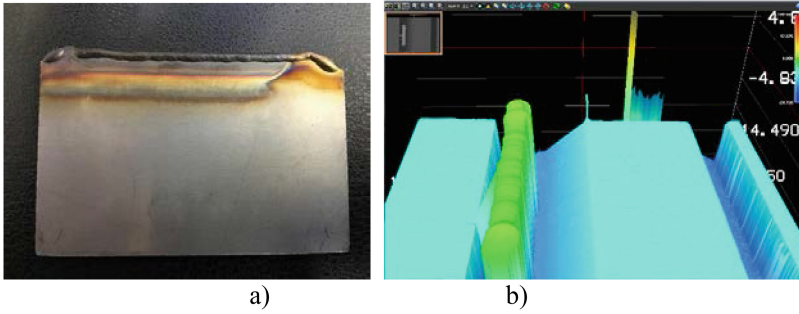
Adaptive robotic welding with AVC ON (a) Flat SS plate, (b) 3D image
